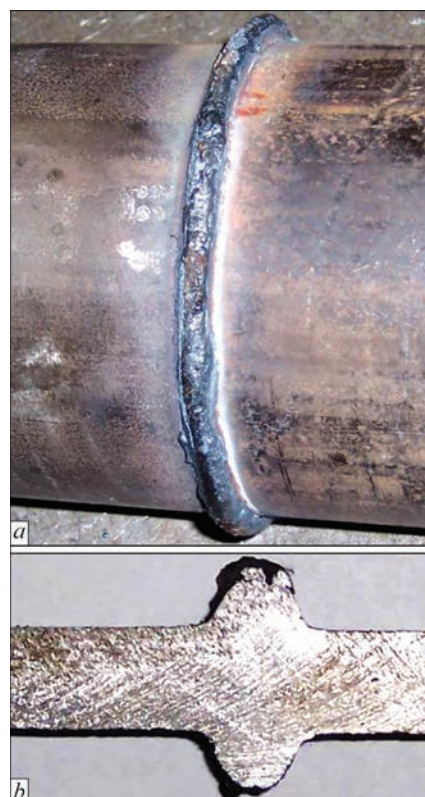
Formation of a welded pipe joint without an upset allowance, where: *a* — welded joint; *b* — cross-section of the welded joint
